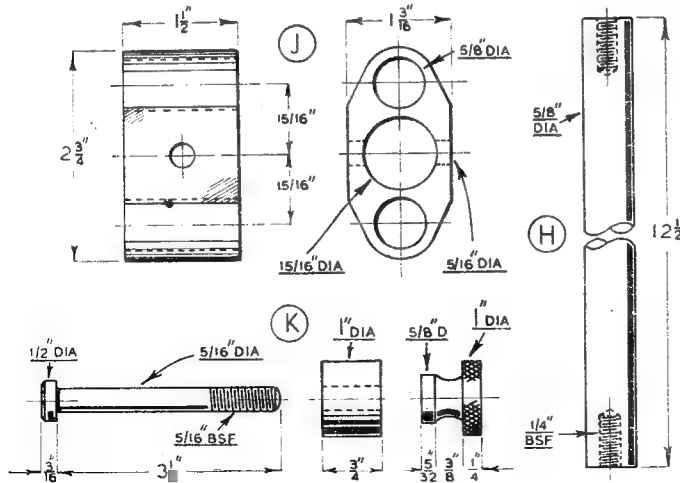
The slidebars—H; the crossheads—J; and the crosshead-bolt—K
